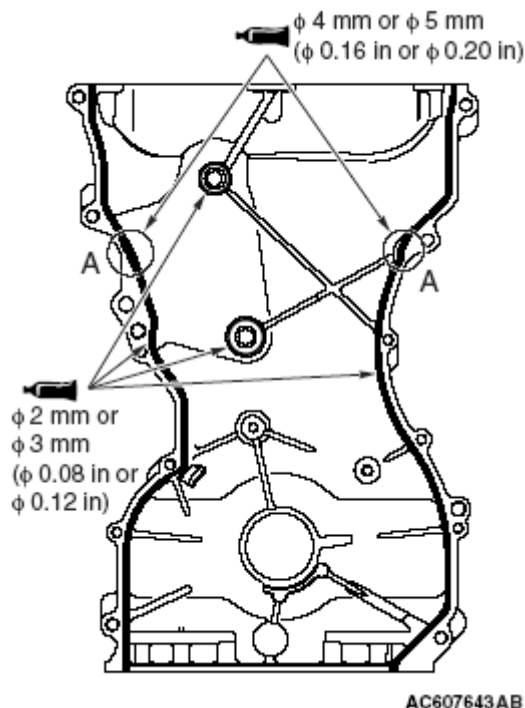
Applying Sealant To Timing Chain Case Assembly Mounting Surface
